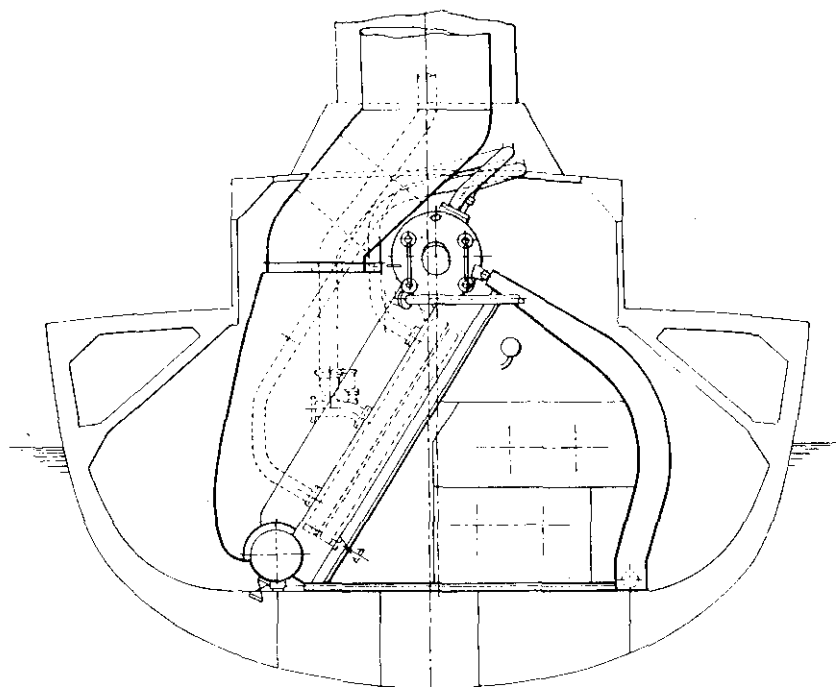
ARRANGEMENT OF FOSTER-WHEELER BOILER IN S.G.B. HULL
